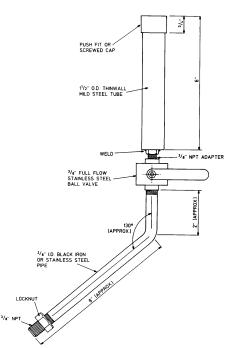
Typical Crankcase Oil Fill Tube and Cap
